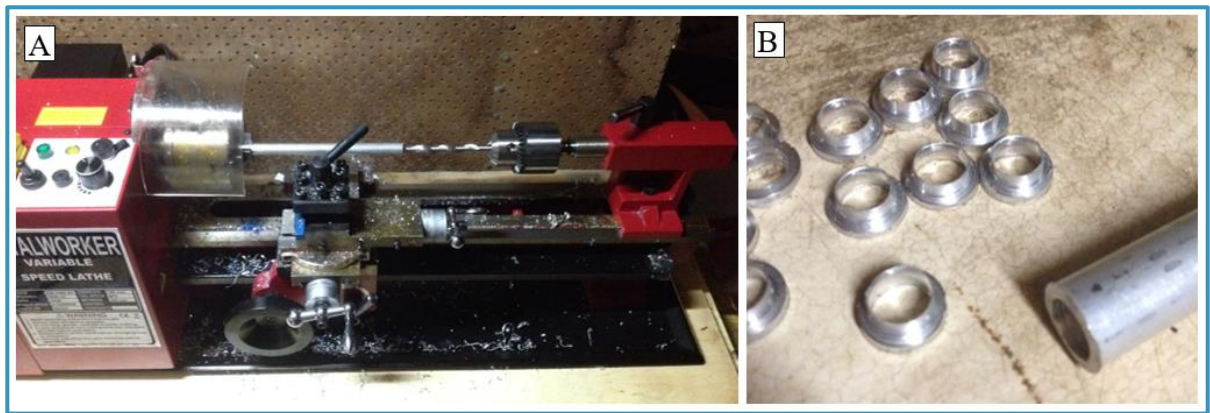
A) Drilling hole in aluminium rod, B) Completed spacers
